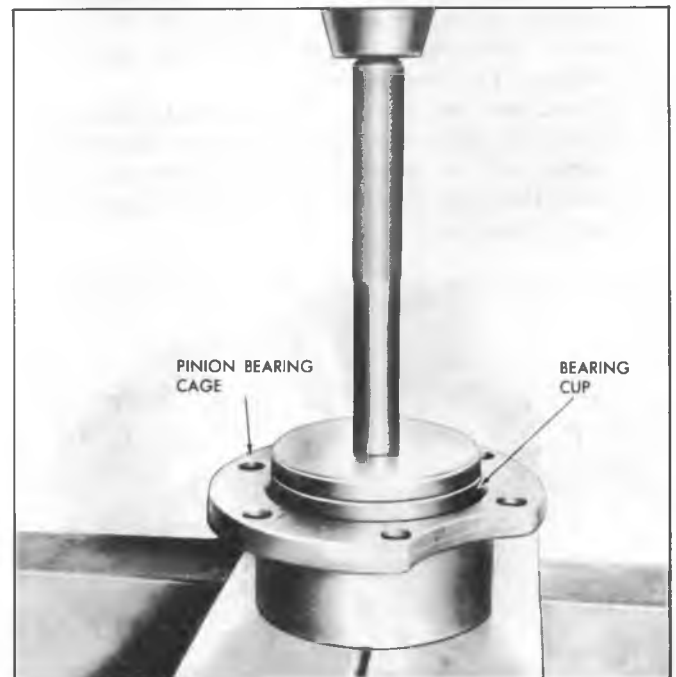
M—Installing Pinion Gage Bearing Cup with Tool J-8479
